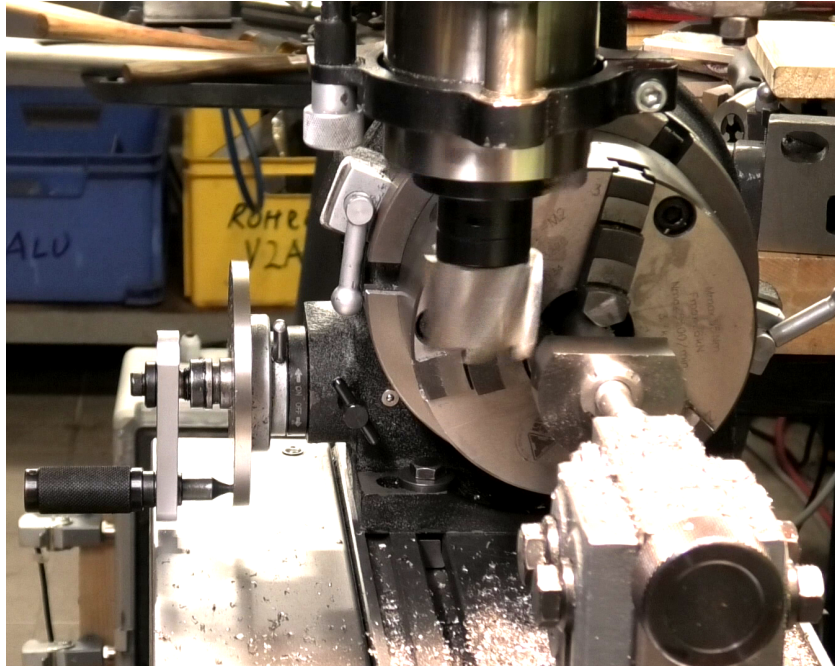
Tangential milling of the cam on a universal milling machine with a commercially available dividing head.
